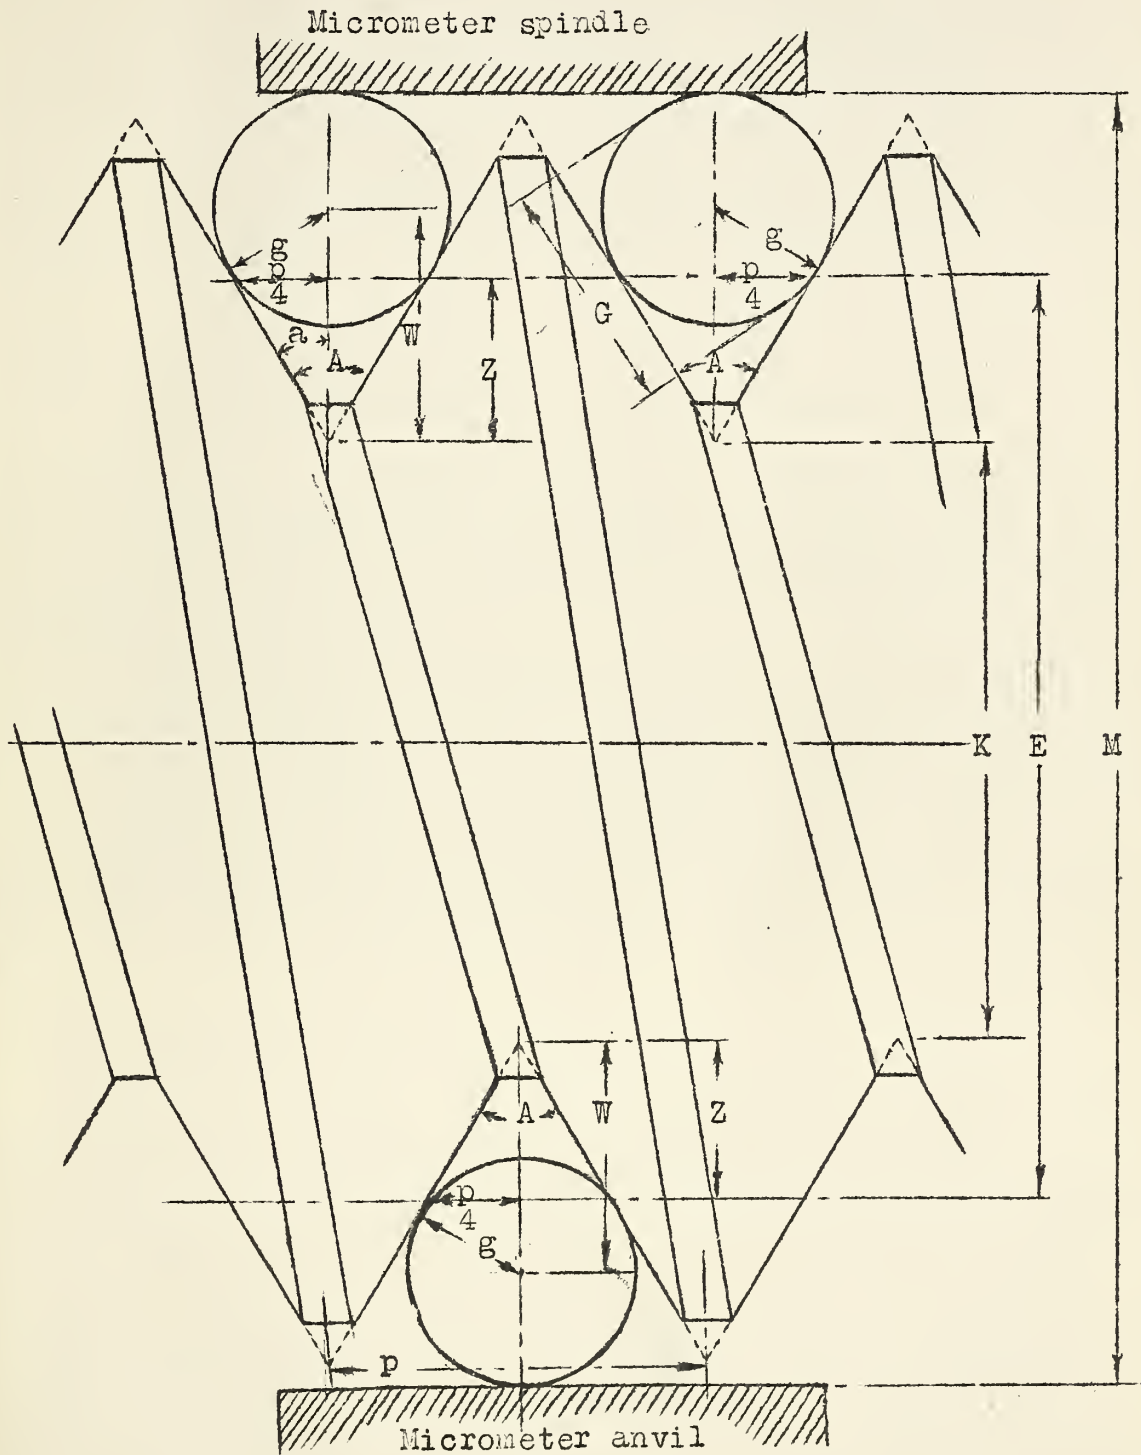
Three Wire Method of Measuring Pitch Diameter of Threaded Plug Gages
